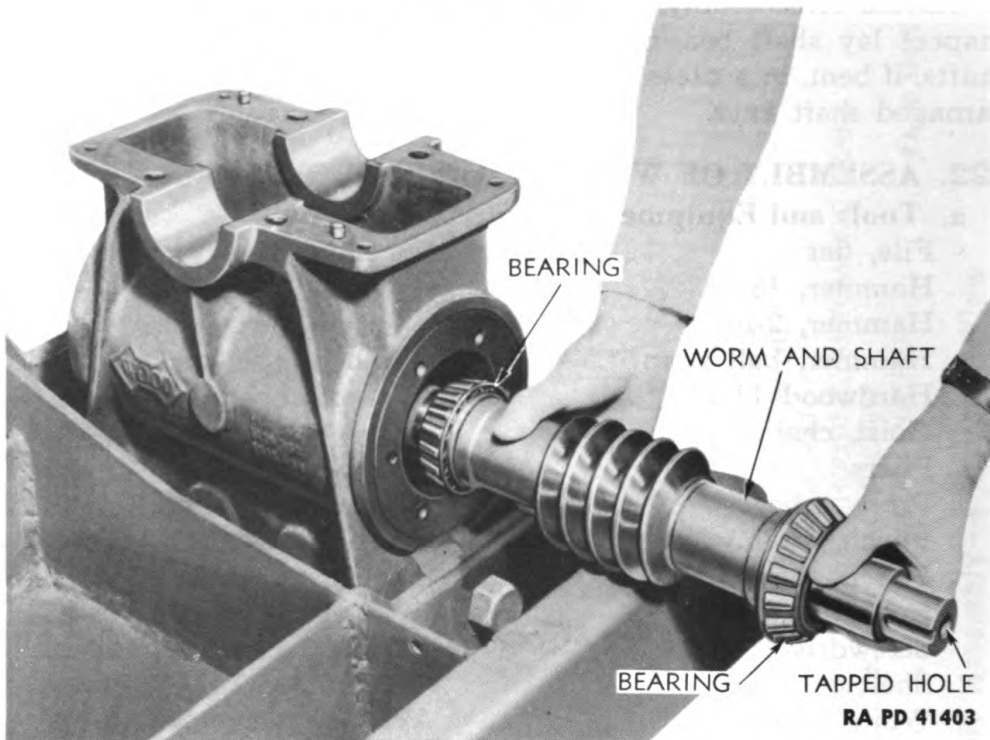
Installing Worm Shaft Assembly in Gear Case
